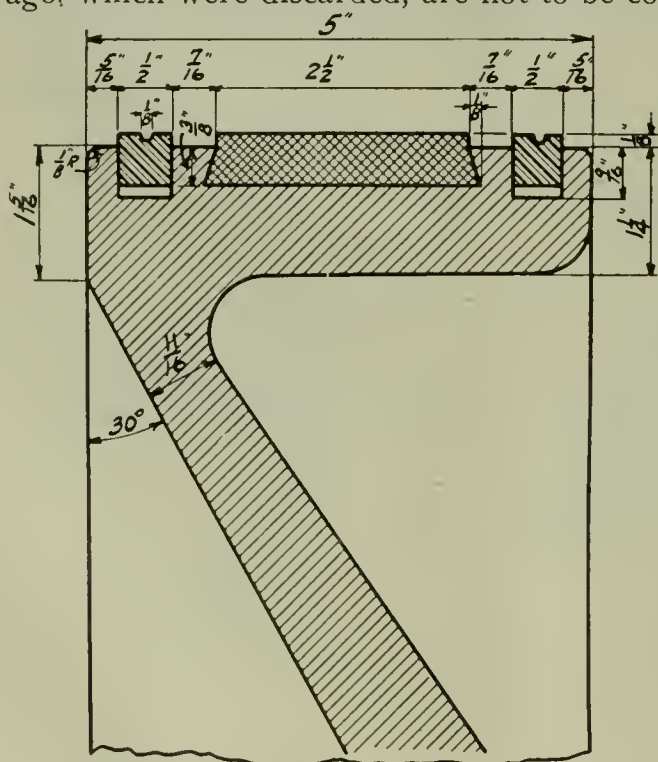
Type of Piston with Groove into Which Molten Bronze Is Poured.
